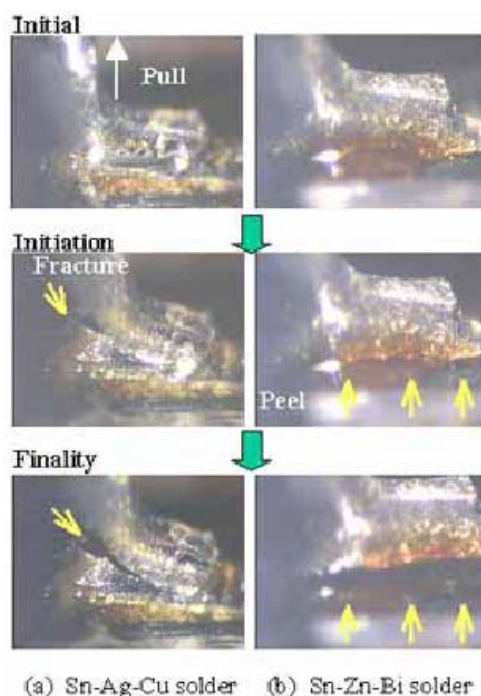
QFP Solder Joints with Sn-10Pb-plated Lead during 45-degree Pull Test after High Temperature Test
